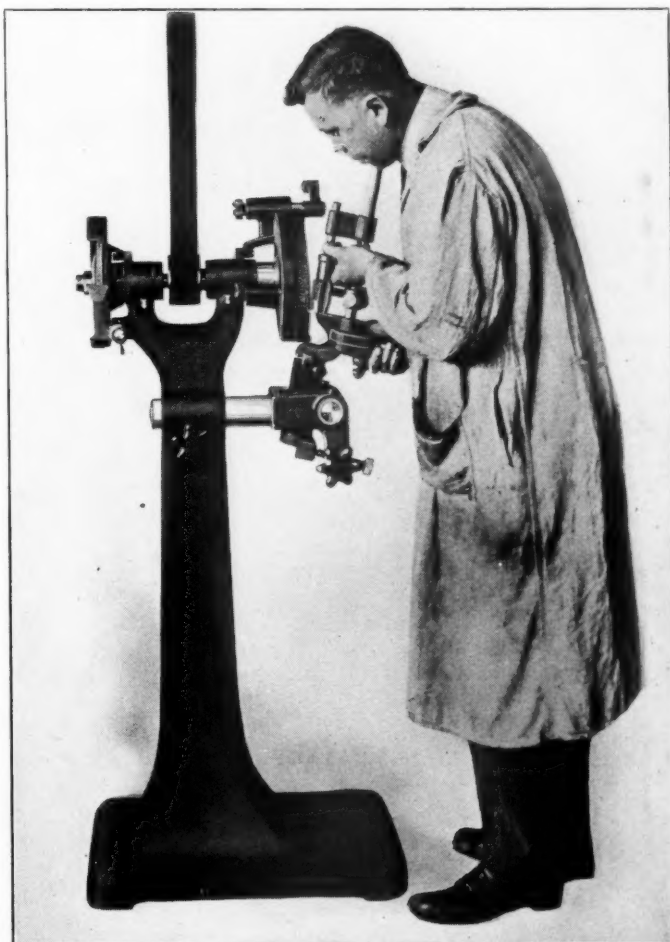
No. 2 Grand Rapids Tap Grinding Machine
